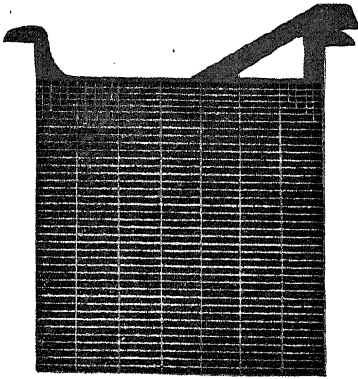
, this consists of a series of small boxes having a top and bottom of perforated sheet lead. The boxes are made in two halves, and for this purpose a perforated sheet of lead is placed in a special mould into which molten antimonial lead is run. This
